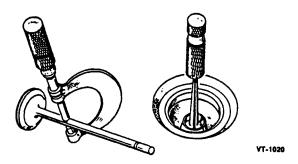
VALVE STEM AND VALVE GUIDE INSPECTION
